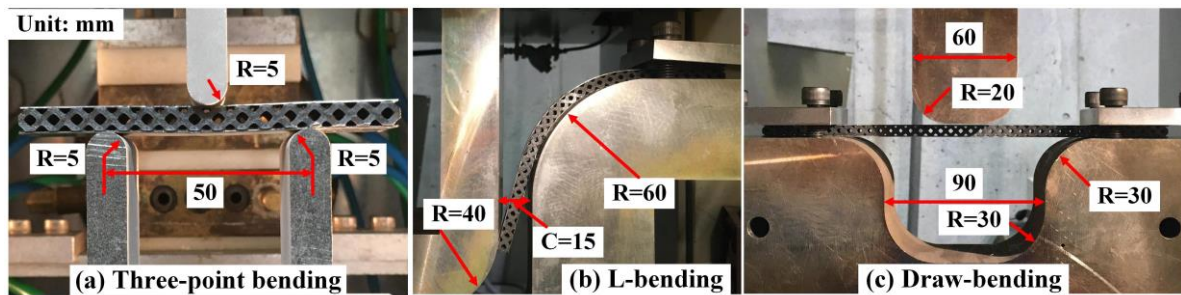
Experimental setups for three-point bending, L-bending and draw-bending tests.
